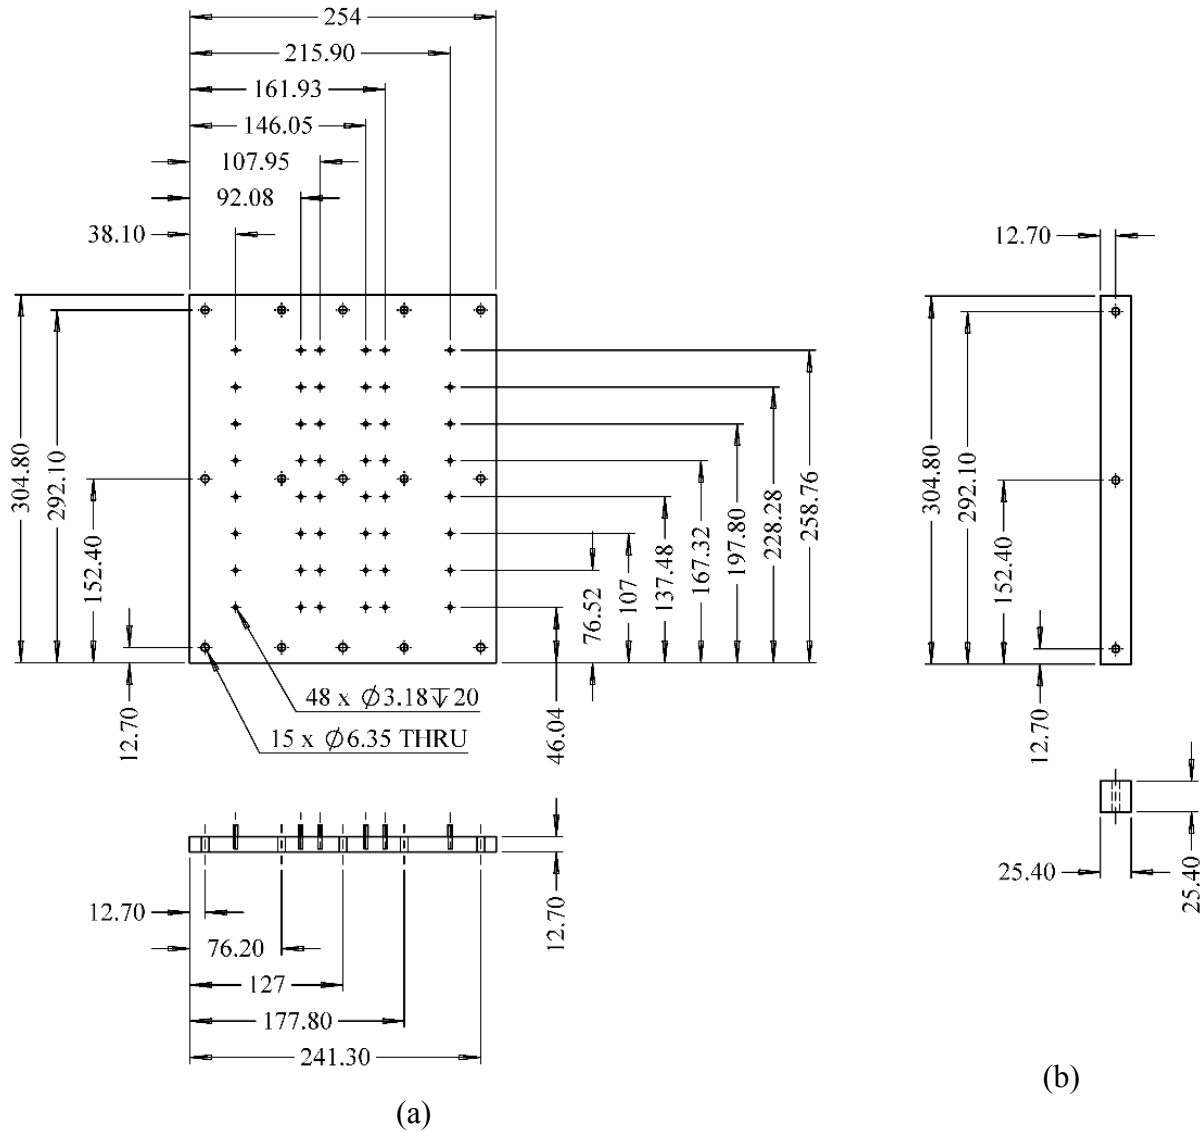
Technical drawing of the sample manufacturing jig components: (a) base and (b) clamp, dimensions in mm
